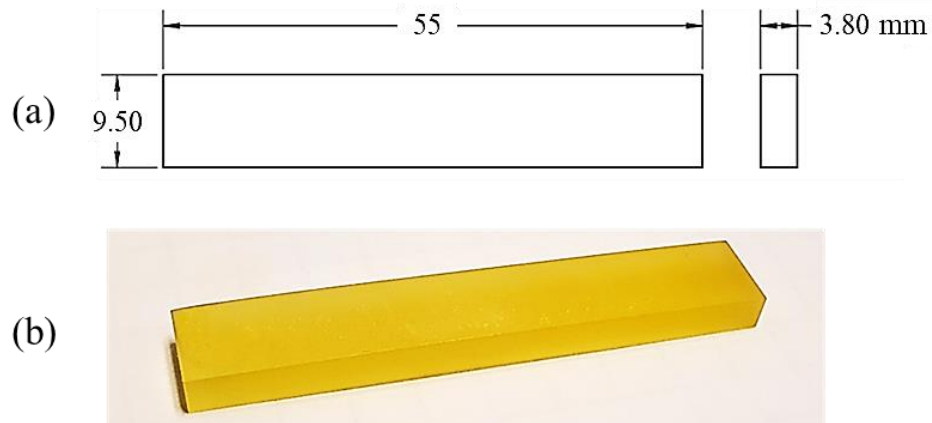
DMA test specimen: (a) dimensions, and (b) image.
